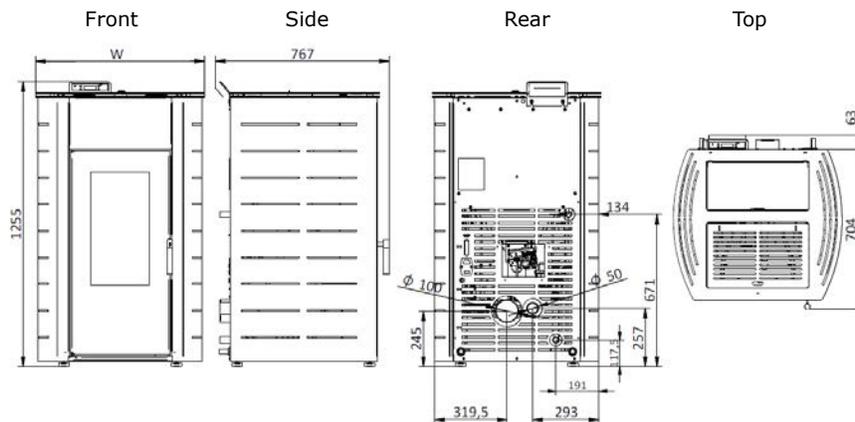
Dimensions of the free-standing pellet fire unit K2300
